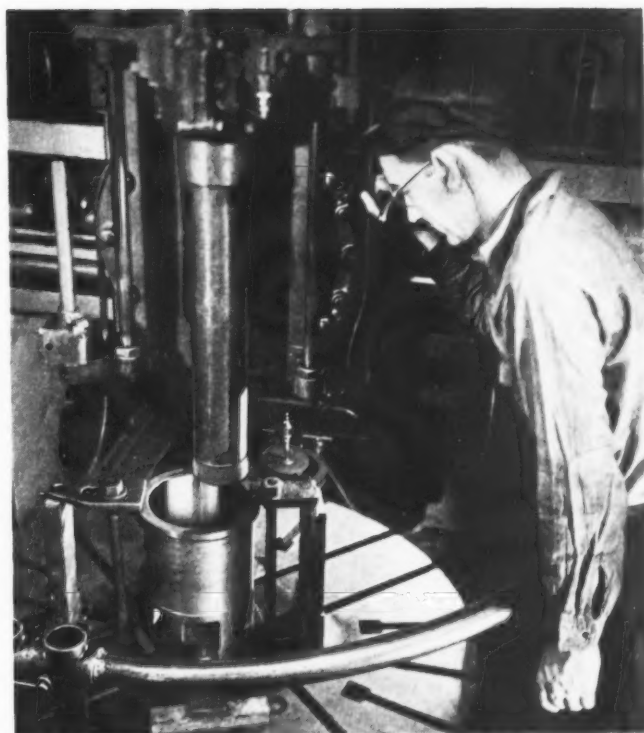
Finishing the Bore of a Stop Check-valve Liner with a Grinding Spindle Mounted on a Vertical Turret Lathe
